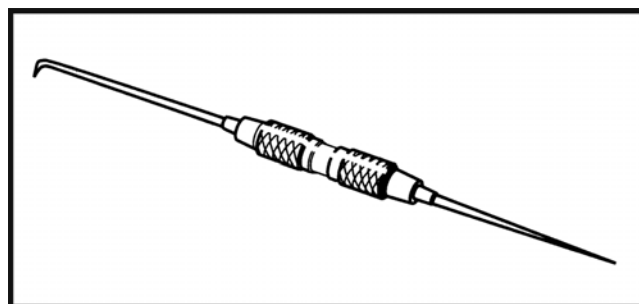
, A Scribe is typically used with layout dye to mark reference points on a material. However, scribe marks should never be used for bend lines as they cause stress concentrations that can lead to component failure.
